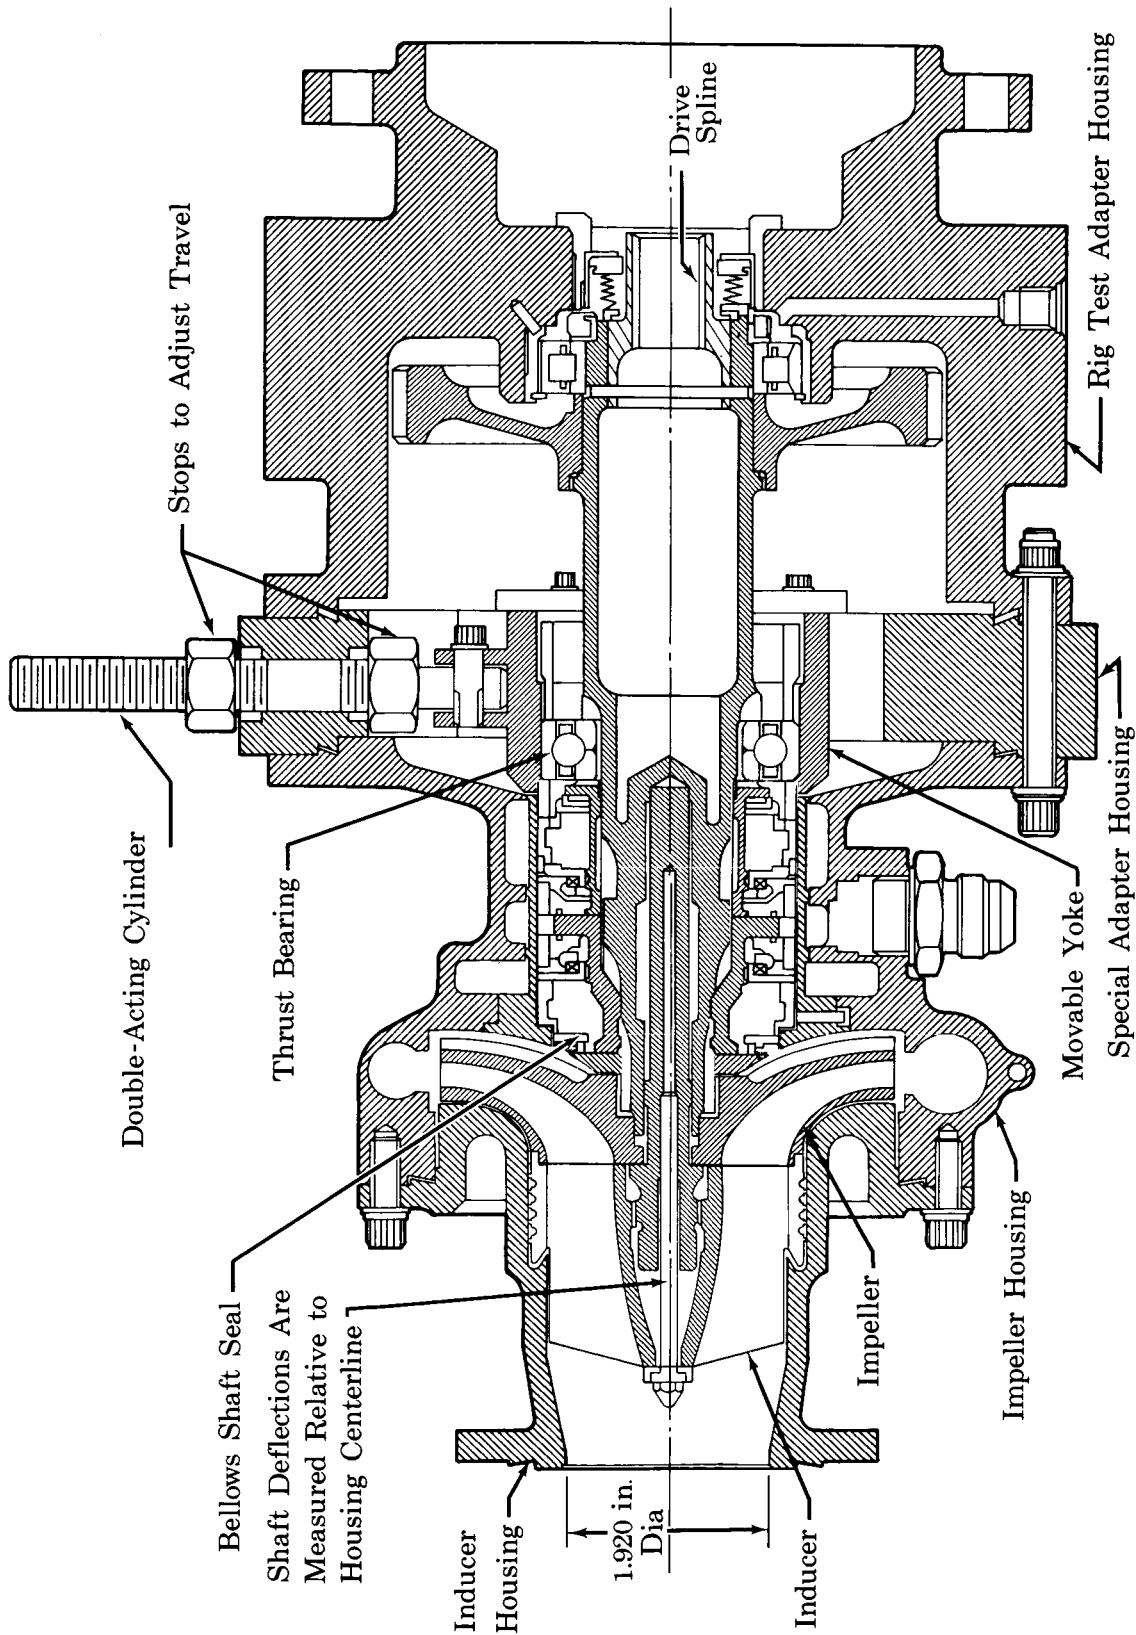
Oxidizer Pump Shaft Deflection Rig
